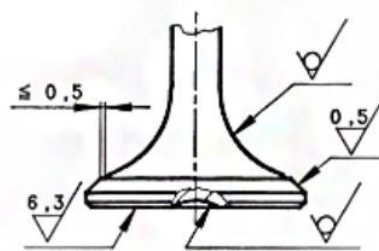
Roughness prescription on the machined head with hard facing [1]
